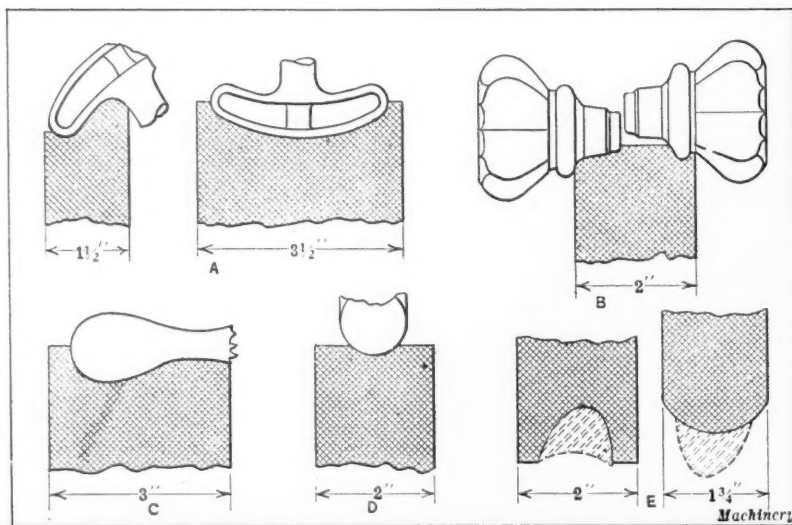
Polishing Wheels of Special Shape designed for handling Fire Extinguisher Handles, Door Knobs, Machine Handles, and Turbine Buckets
